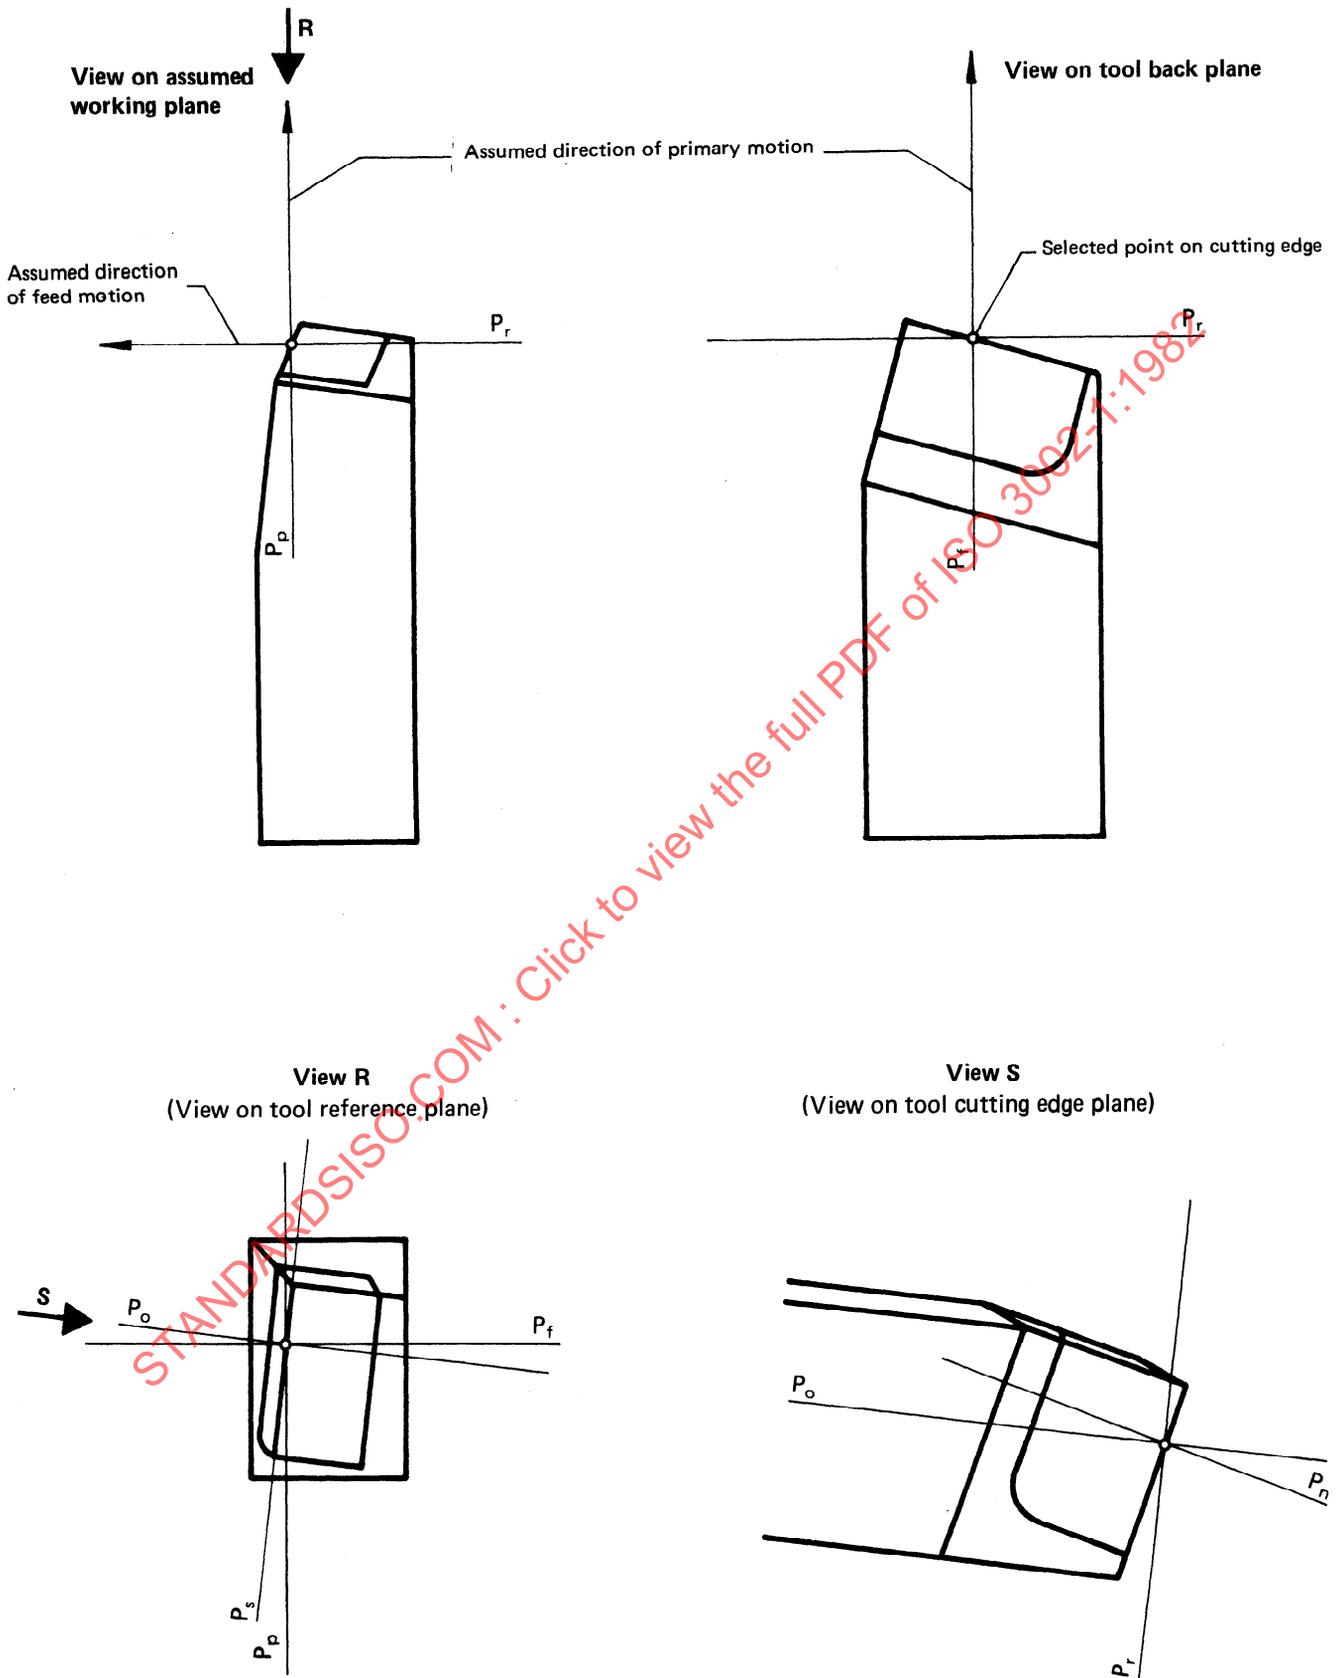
Planes in the tool-in-hand system — Tangential turning tool
